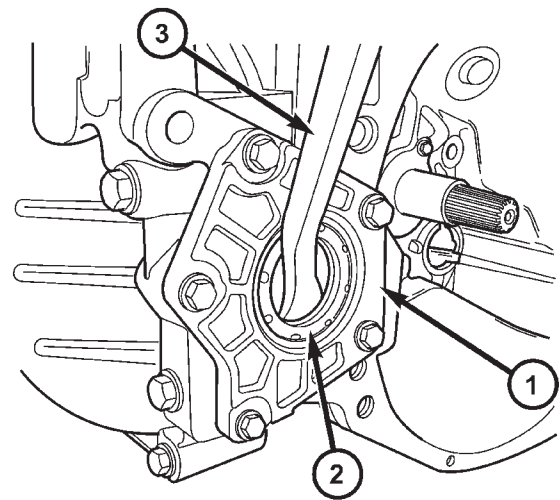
Axle Seal Removal (Bearing Plate Side)
